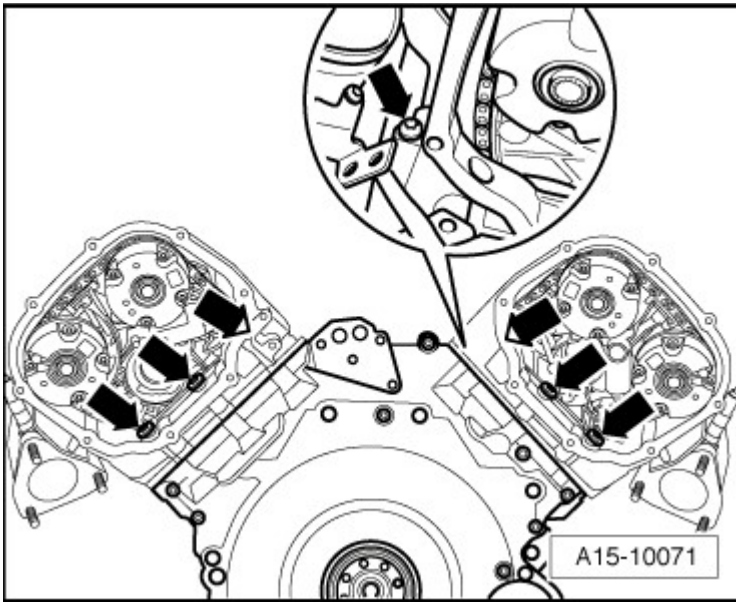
Identifying Bolts At Rear Of Cylinder Head
